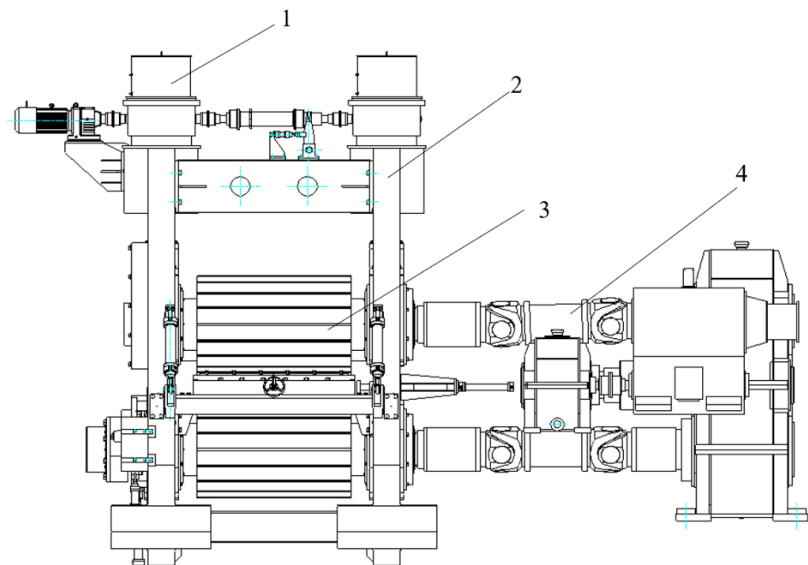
Schematic diagram of rolling mill structure: 1. Worm gear and worm pressing device; 2. Frame structure; 3. Roll assembly; 4. Main drive unit.
